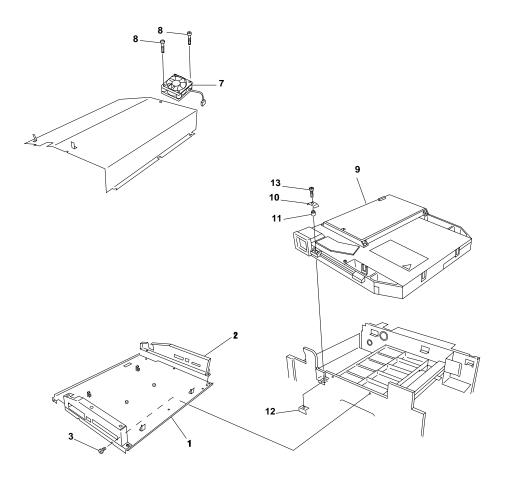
Main Controller and Optical Units Parts Locational Diagram
